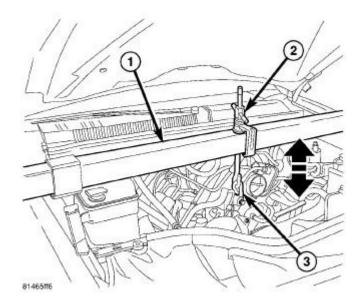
ENGINE SUPPORT TOOL Courtesy of CHRYSLER LLC
